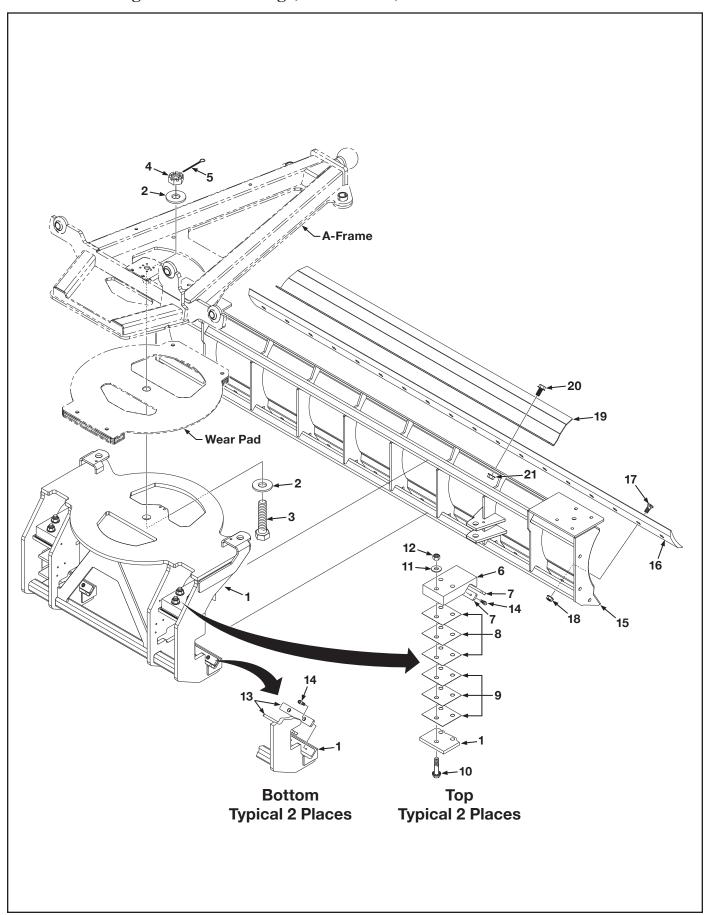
Carriage, Moldboard, Blade and Related Parts
